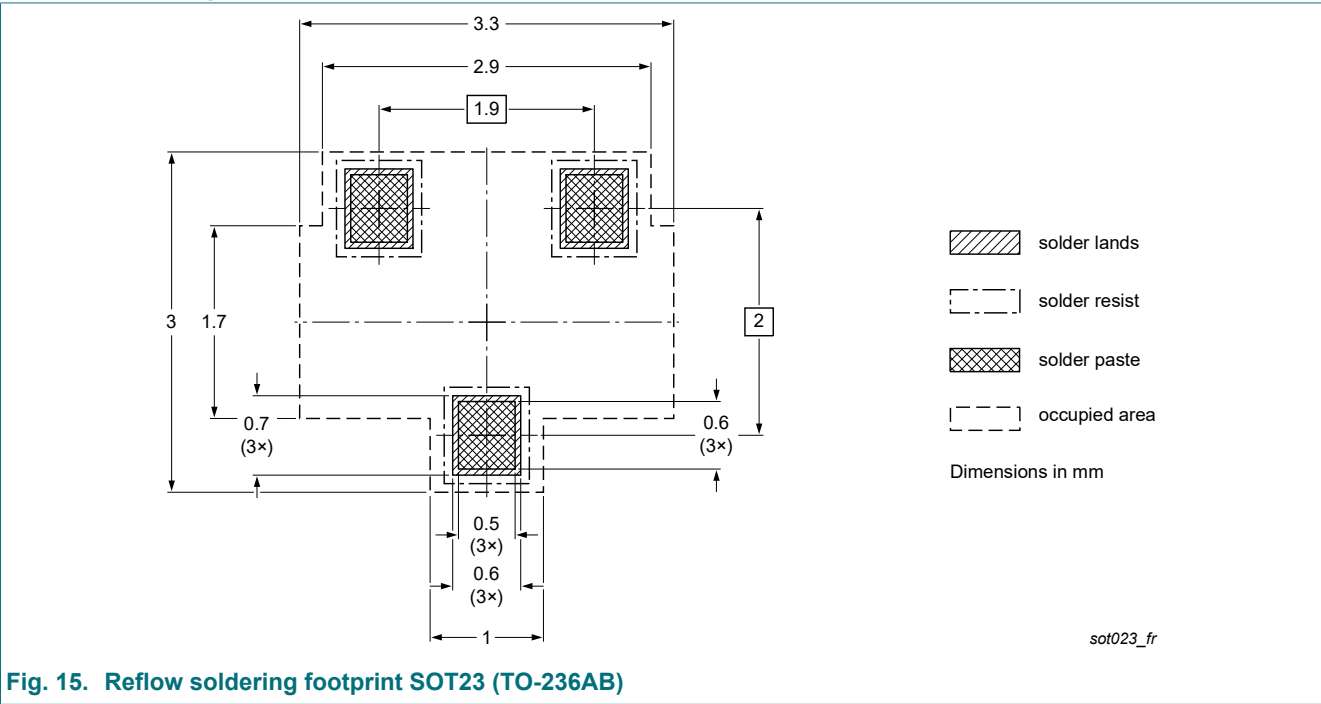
Reflow soldering footprint SOT23 (TO-236AB)
